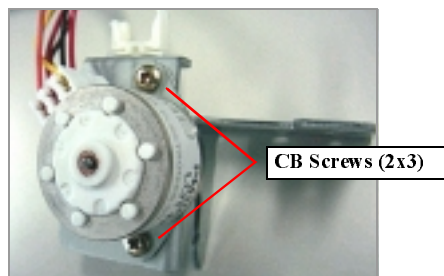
“MOTOR ASSEMBLY, FOCUS” Removal (2)
